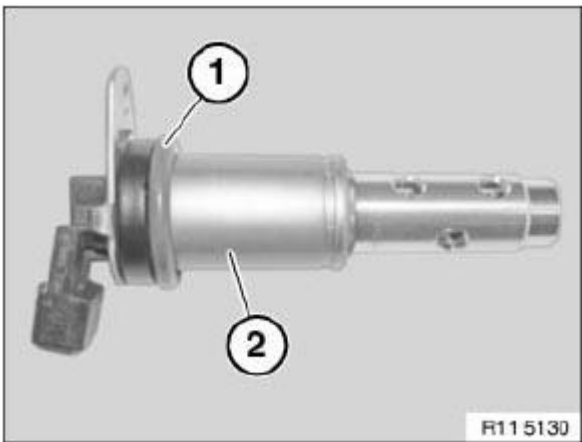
Identifying Sealing Ring On Solenoid Valve
